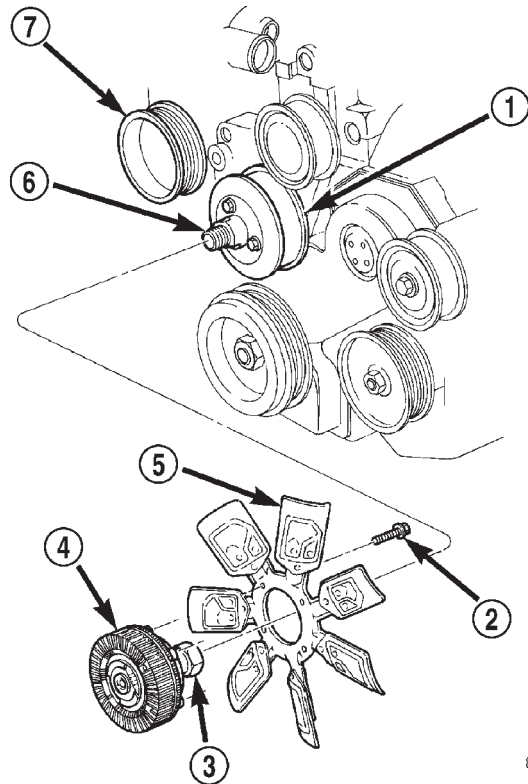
Thermal Viscous Fan Drive and Blade Assembly
